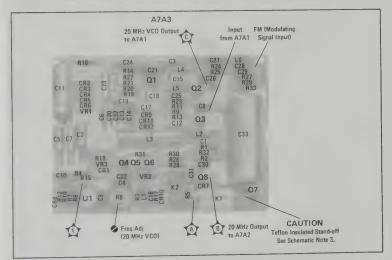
A7A3 20 MHz VCO Assembly Component Locations
